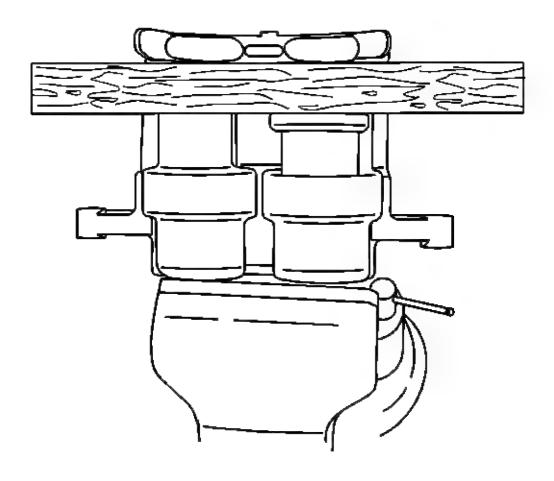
Installing Piston Into Bore Courtesy of GENERAL MOTORS CORP.
